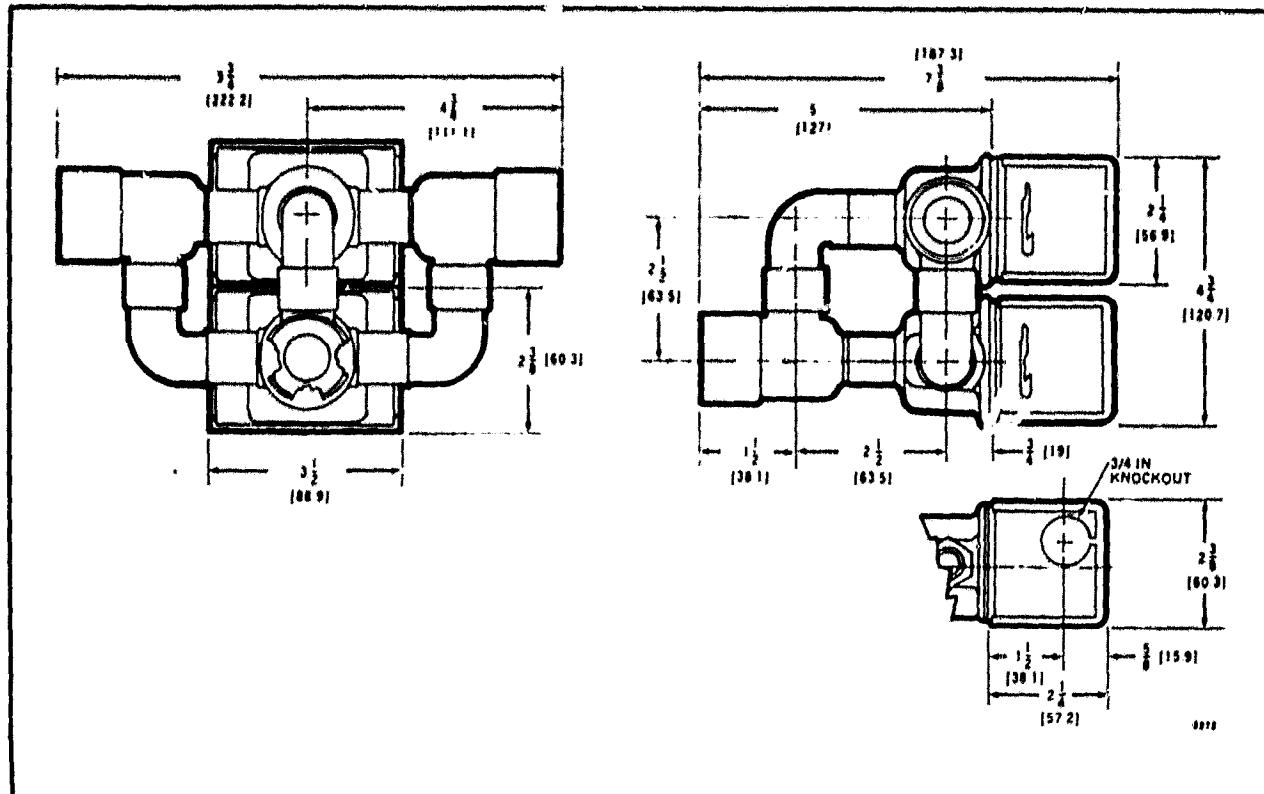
Y534A DIMENSIONS IN INCHES [MILLIMETRES IN BRACKETS].
